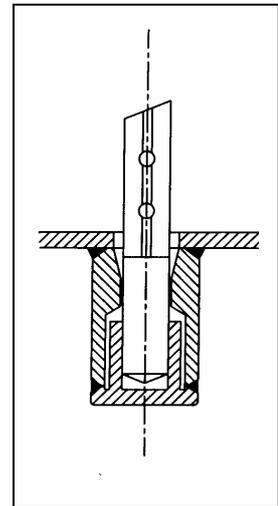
End support IBFD-HT, two-part welding construction
